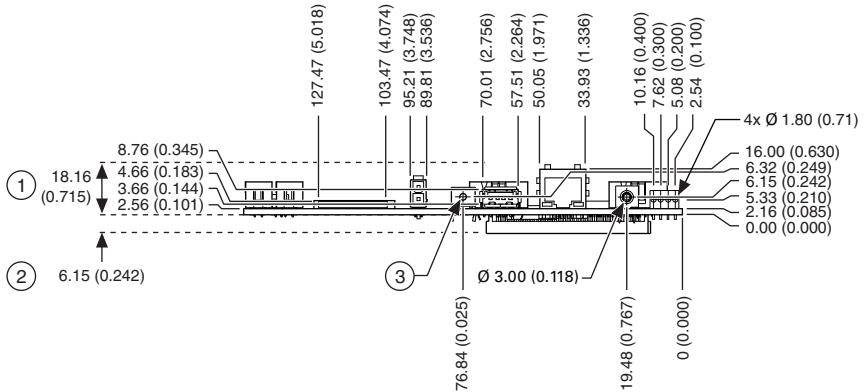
NI sbRIO-9605/9606 Front Dimensions in mm (in.)
